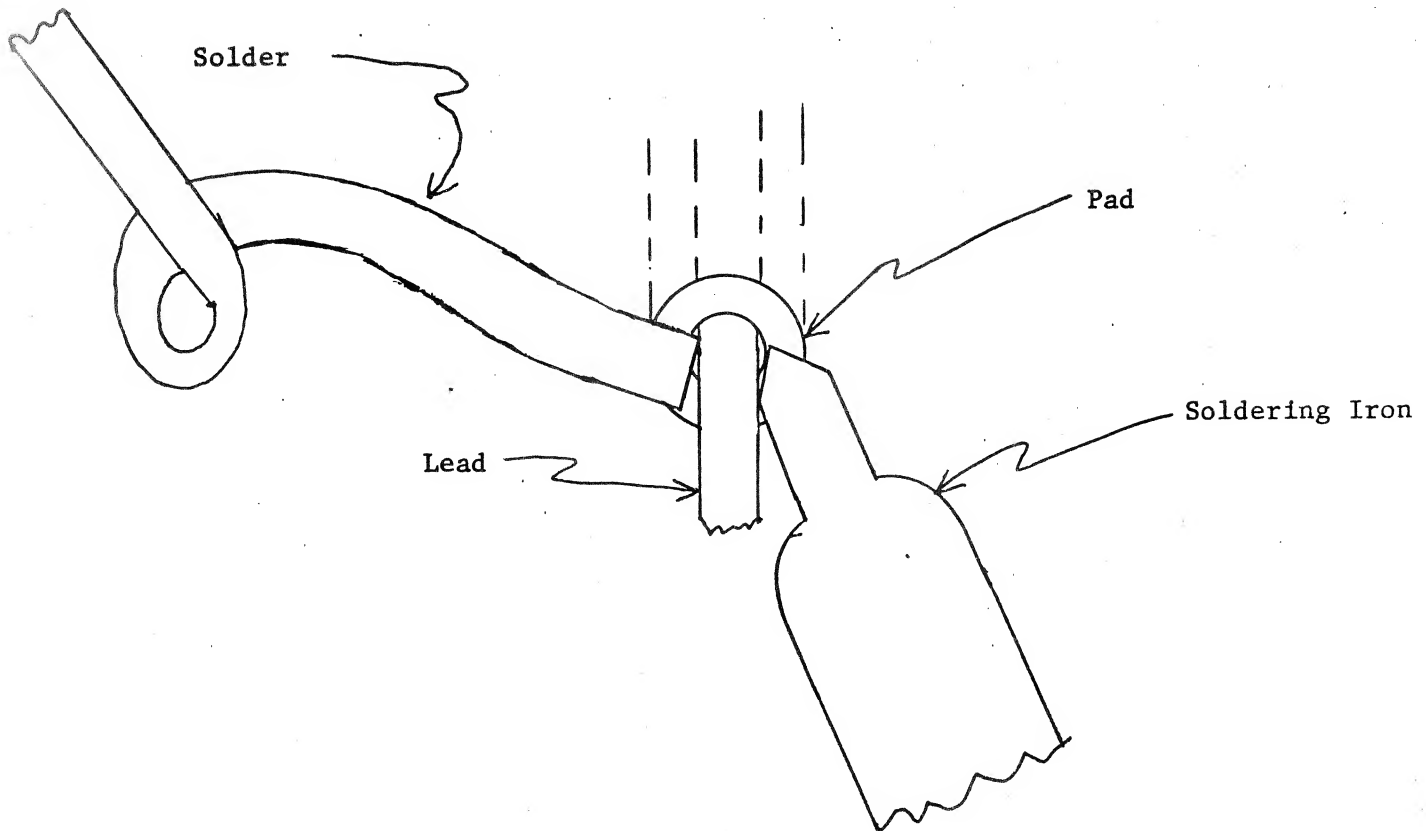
Soldering Technique-apply solder to opposite side of lead from the soldering iron
